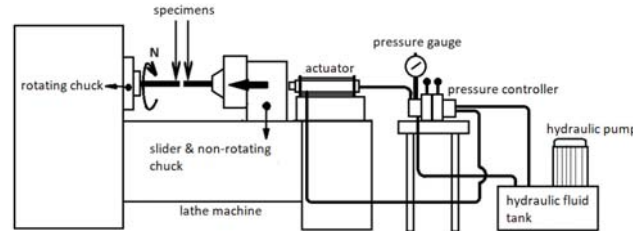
Lathe machine equipped with hydraulic powerpack system for RFW experiments
